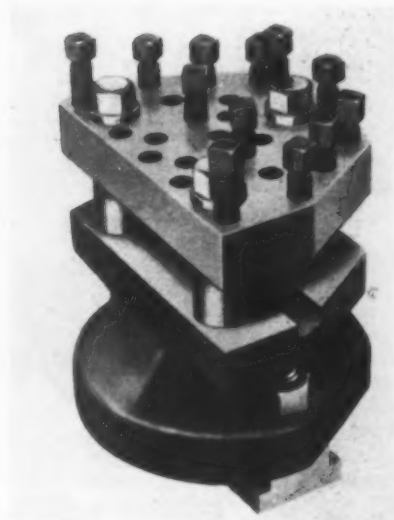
Front Cross Slide Cutter Block for Multiple Facing and Forming Operations
